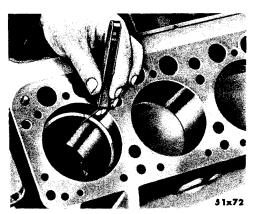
Checking Ring Gap in Cylinder Bore (Typical)
